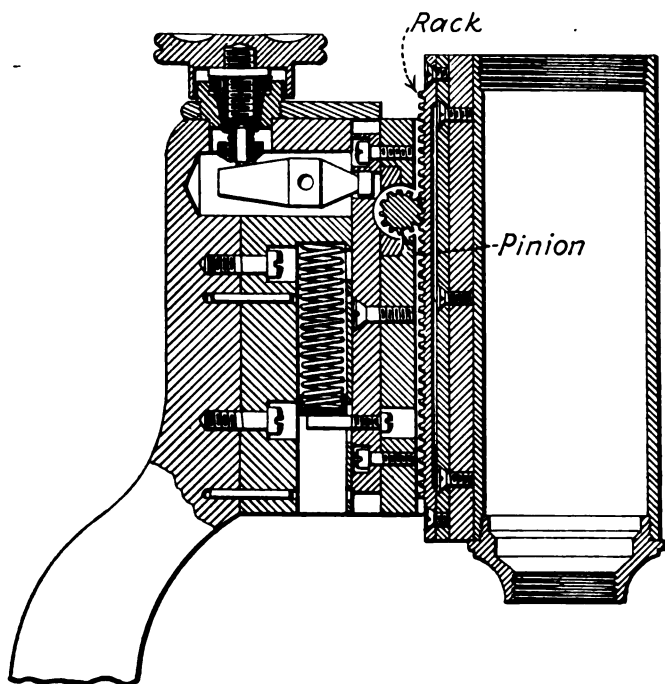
ASSEMBLY SHOWING RACK AND PINION.
